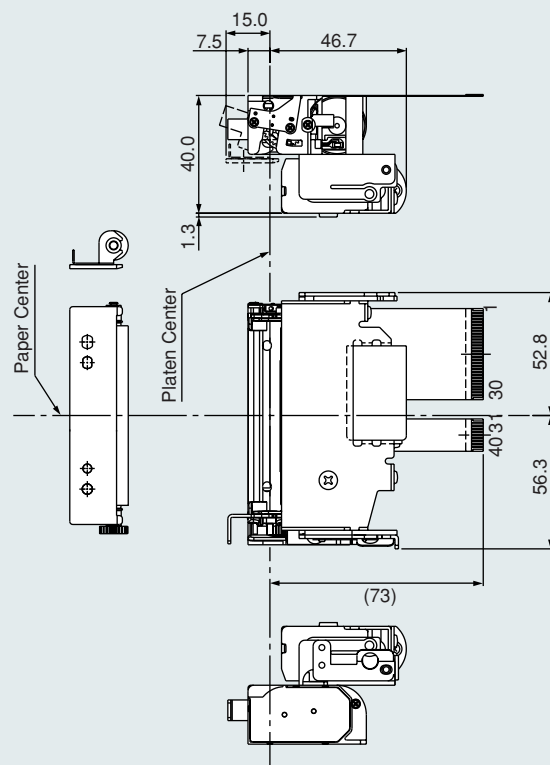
Dimensional Outline Drawing (FTP-639MCL103 + FTP-639CT001 *)
